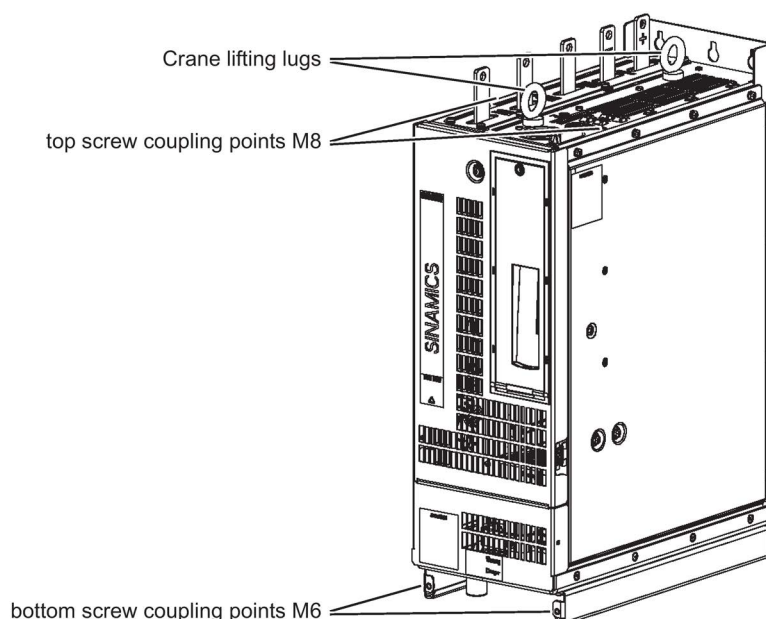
Crane lifting lugs / screw coupling points for mechanical support
